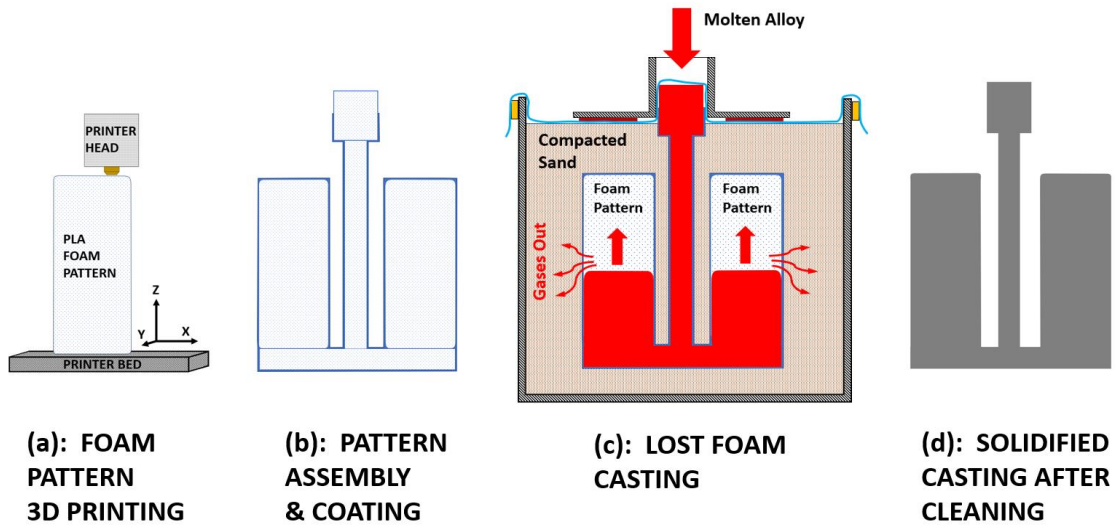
Hybrid Lost Foam Casting process: (a) 3D printing of the foam pattern; (b) pattern assembly and ceramic coating; (c) direct casting of the pattern in a vacuum-assisted flask with compacted sand; and (d) resulting casting after solidification and cleaning.
